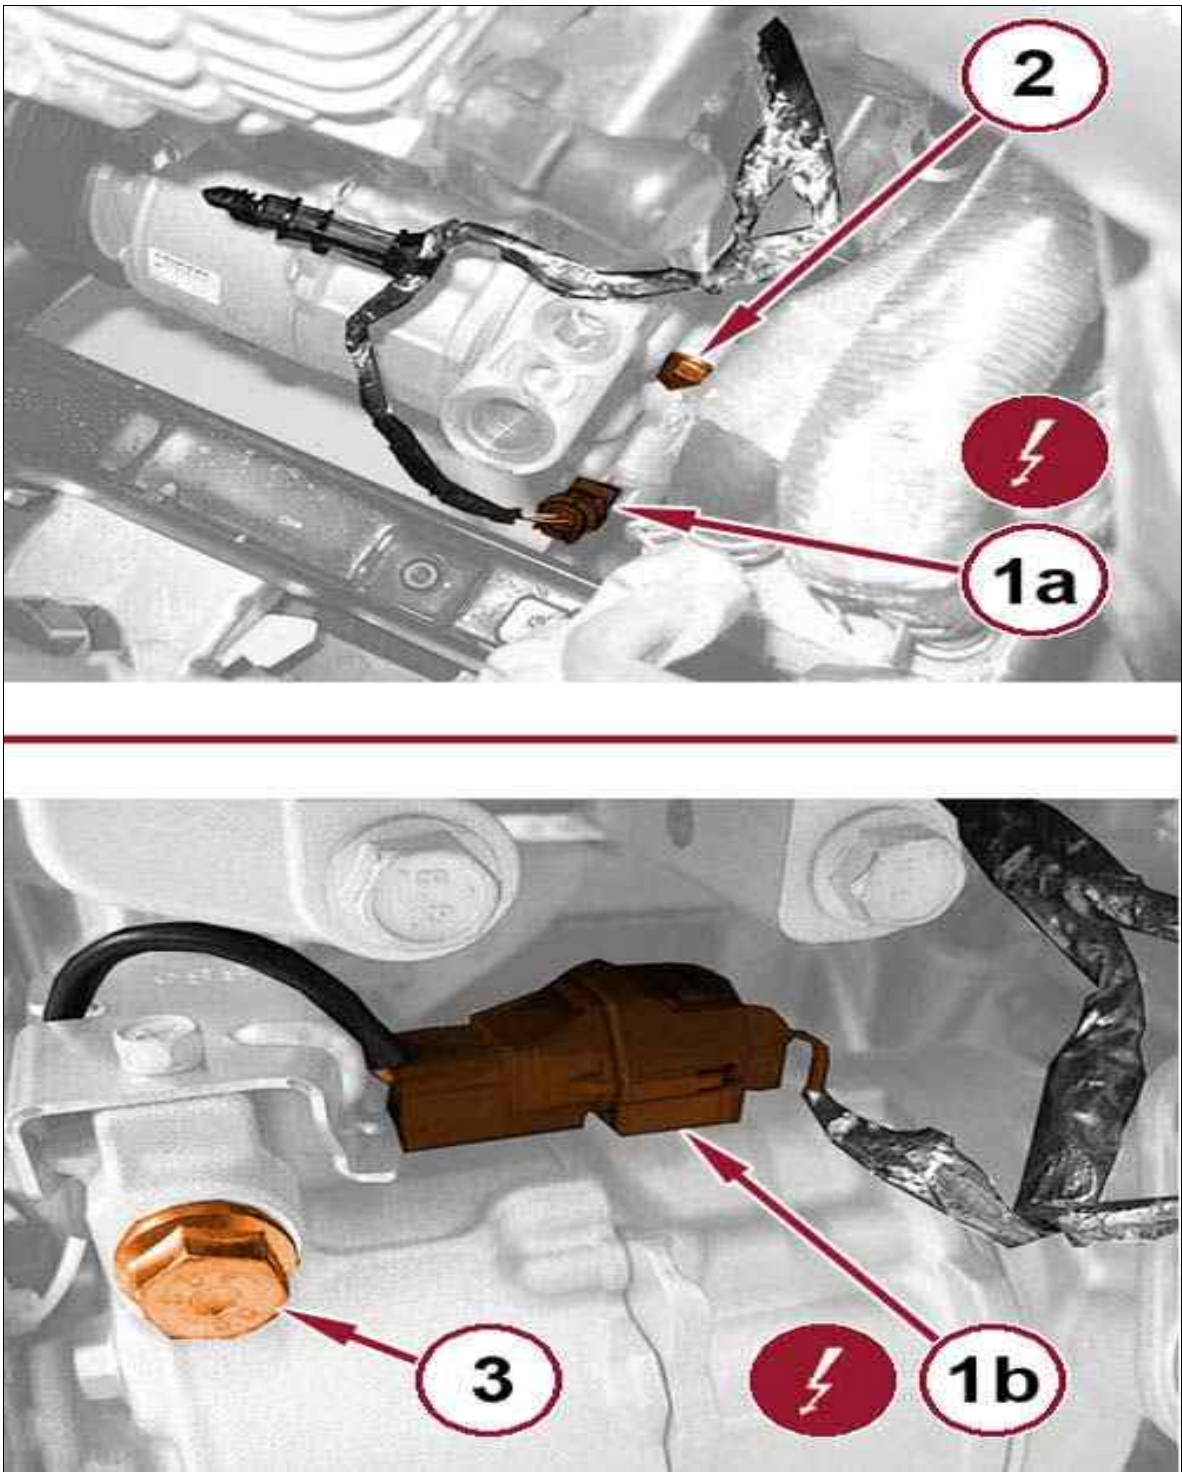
Wiring Retaining Bracket To Cylinder Head & Bolt
